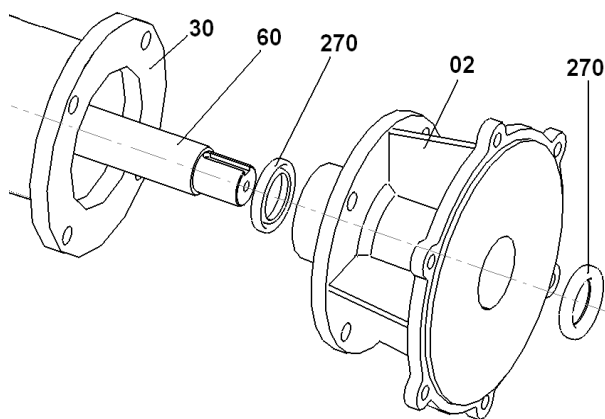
Removing the top cover (Removing the fixed graphite bearing)
